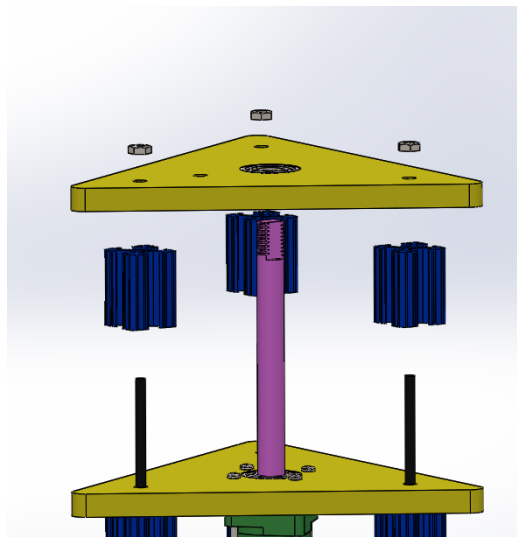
Top Bearing Retainer Sliding Over Main Torque Rod
